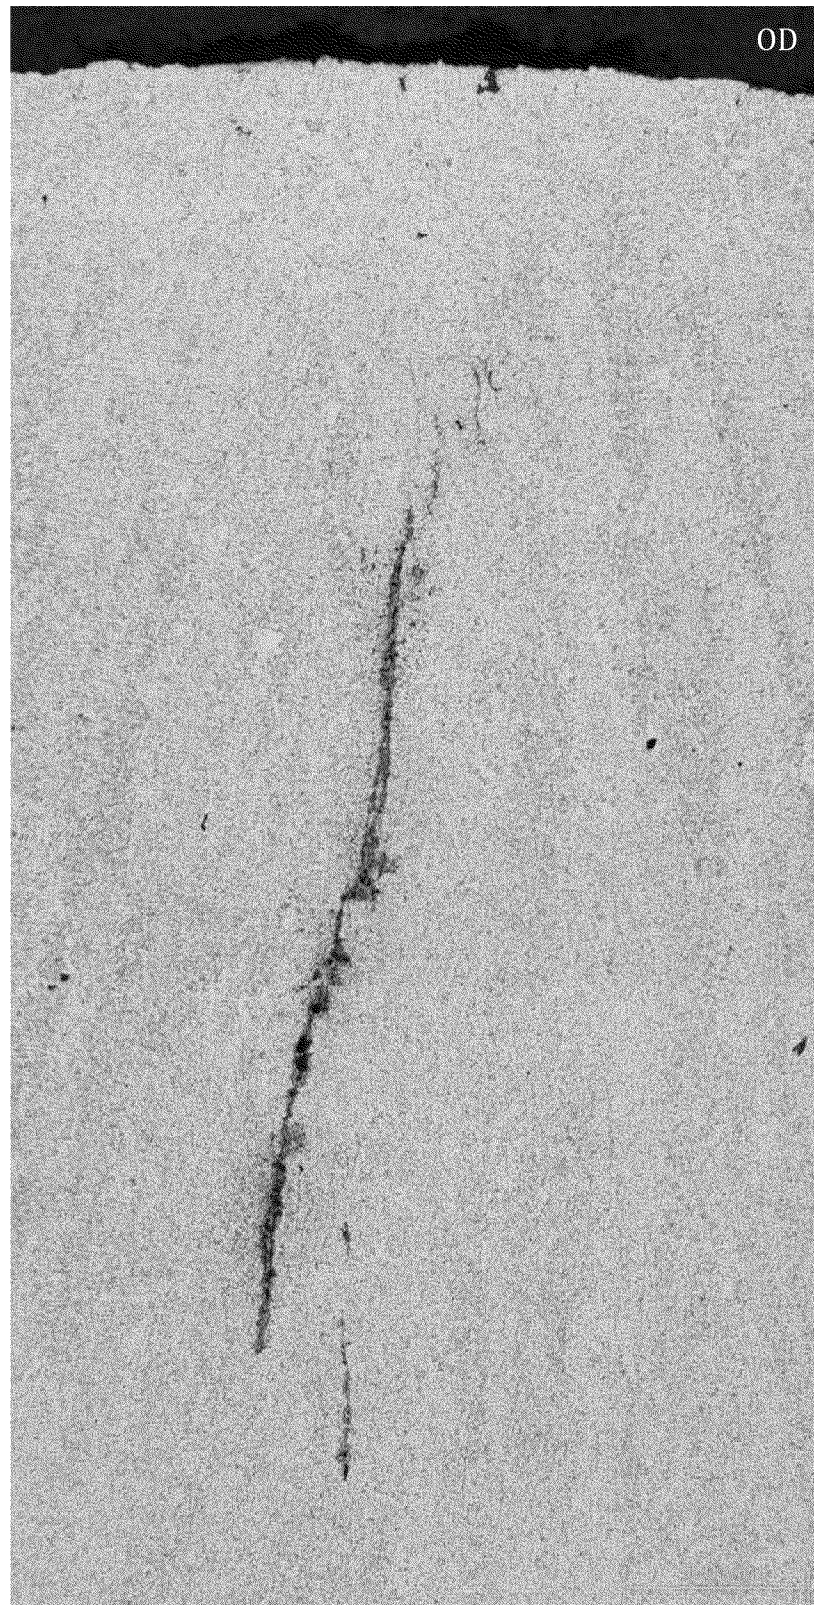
Metallographic montage of OD weld solidification-cracking in Sample T117-CC-T-W.
